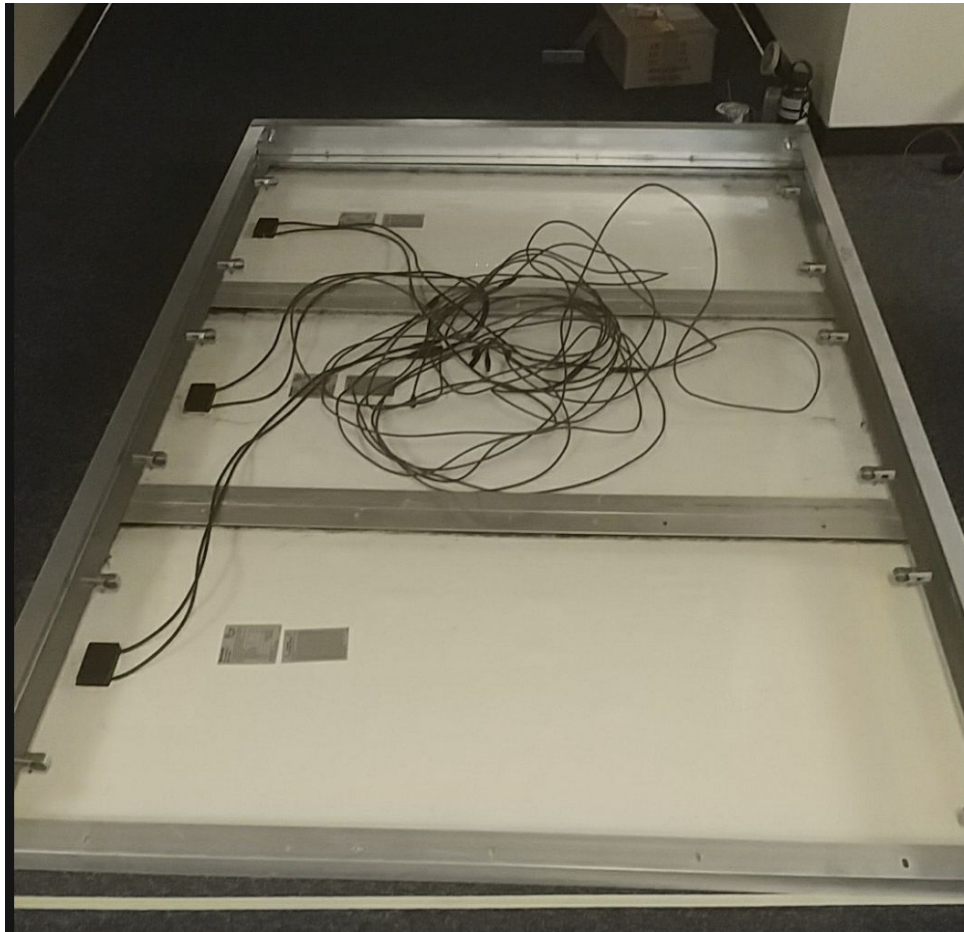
Solo assembly process of solar panel to solar frame using Gator Clamps.
